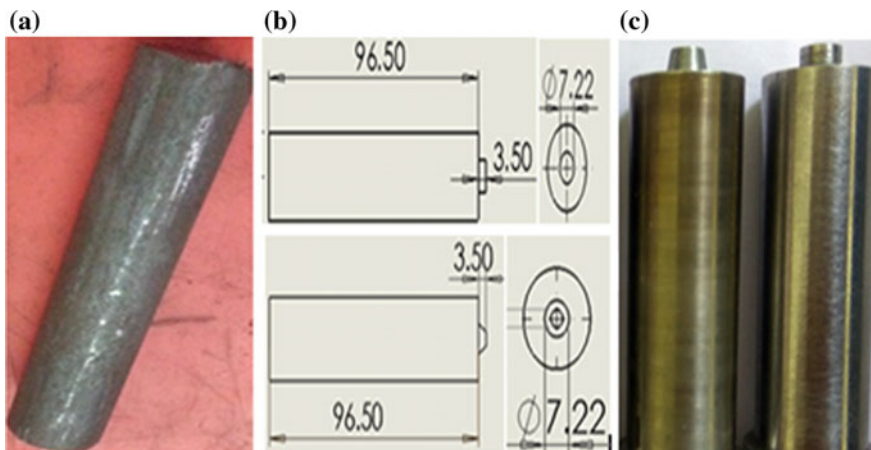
a H13 tool steel rod, b dimension of tool, and c after turning
